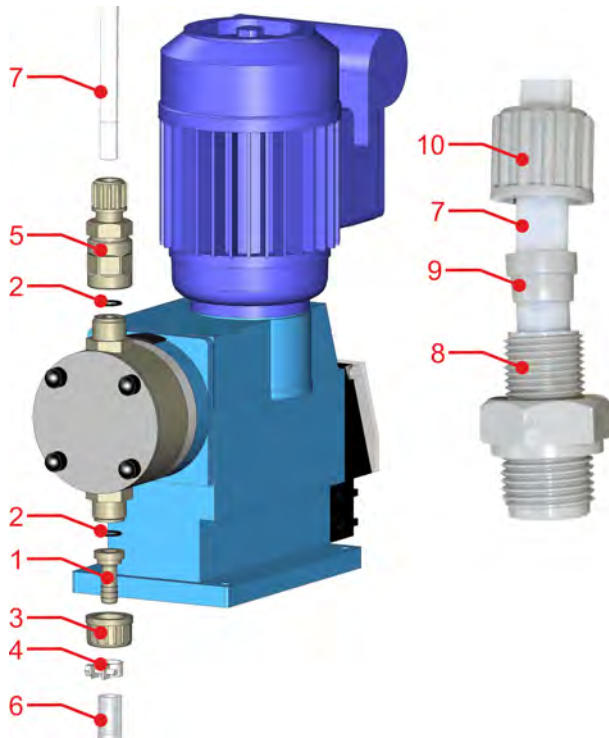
Assembly of the pump connection kit for the EMP III pump (54 l/h)
